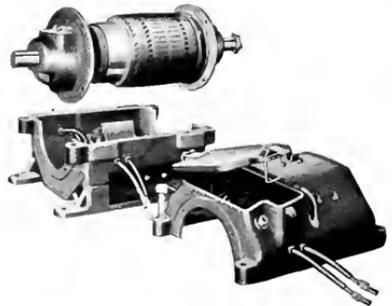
View of Disassembled Winch Motor. Arrangement of parts facilitates dismantling
